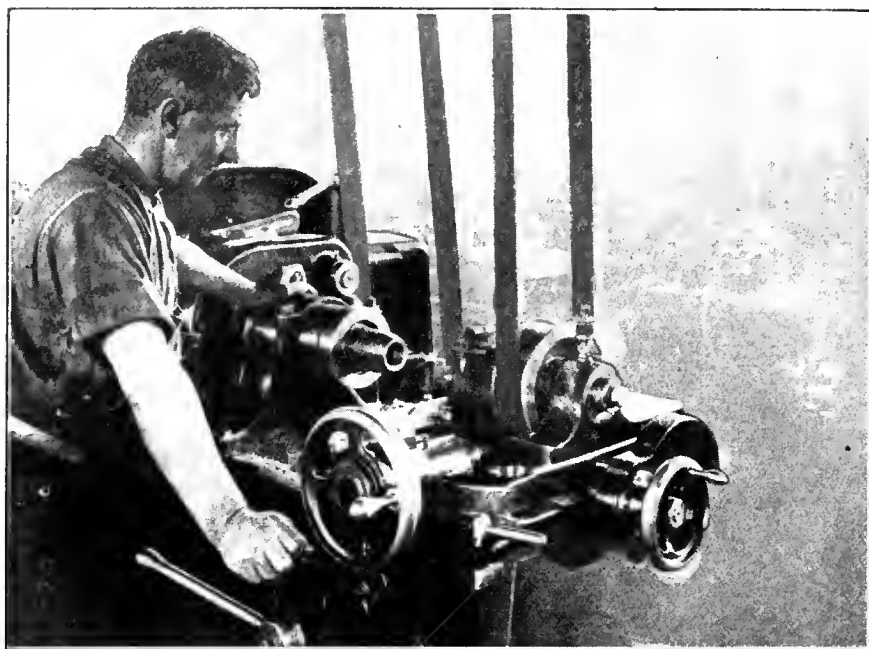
THREADING NOSE OF HIGH EXPLOSIVE AND SHRAPNEL SHELLS ON A "LEES-BRADNER" THREADING MACHINE.
